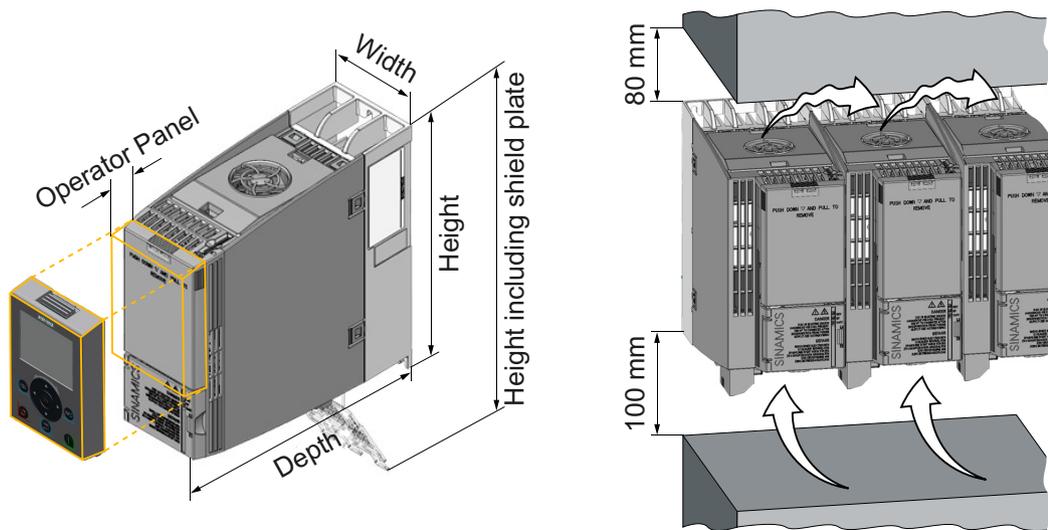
Dimensions and minimum spacing to other devices, FSAA ... FSC
